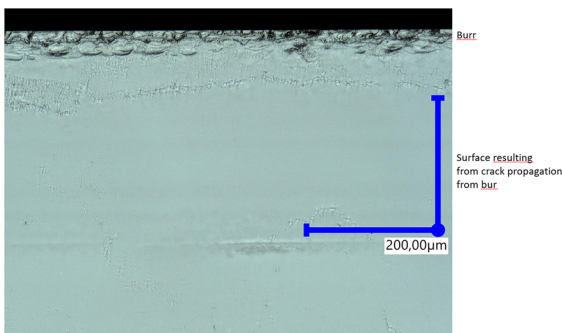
Surface of machine cut glass without edge processing, machine made score on top and the clean cut resulting from the breaking process below. Edge of specimen X1
